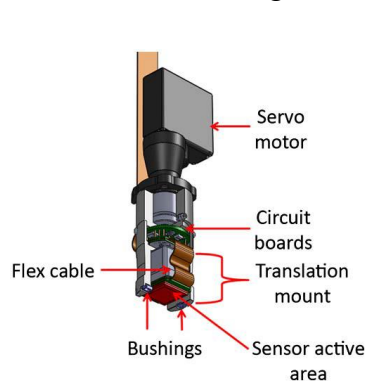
(Color online) Solid drawing of complete sensor module assembly.
